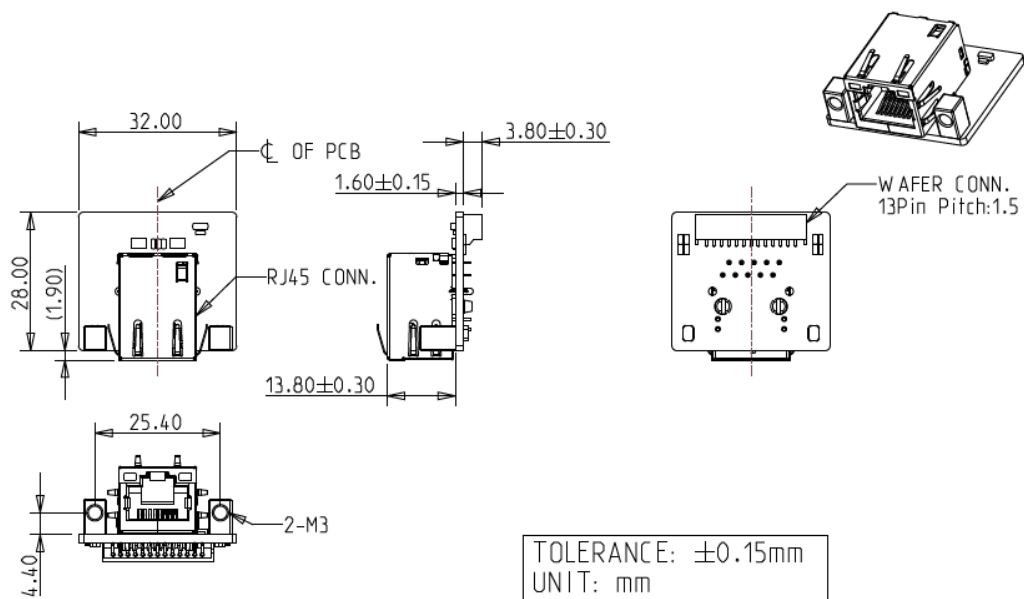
Mounting Hole Daughter Board Drawing (EGPL-G1S3-C1/W1)
